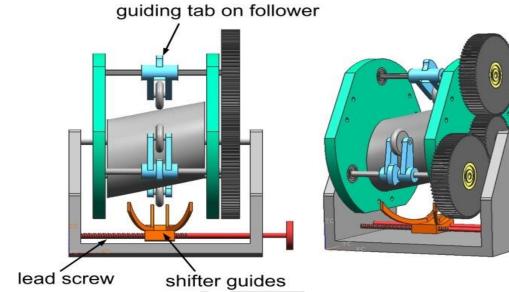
The front and isometric view of a concept transmission showing the shifting mechanism.
